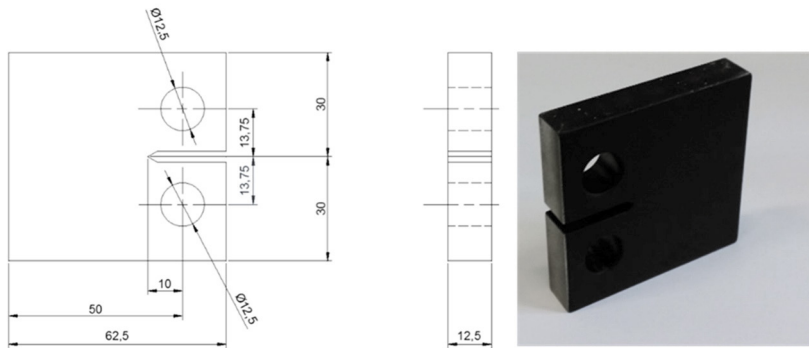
Specimen dimension in mm according to ASTM E 647.
